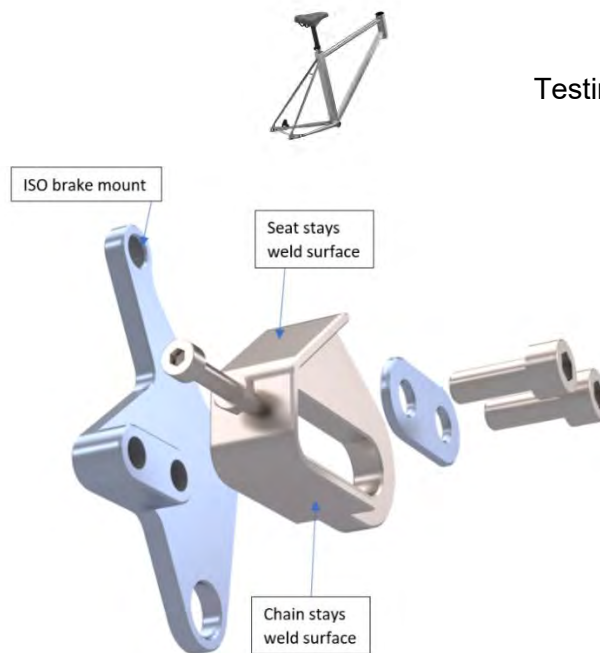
Exploded view of components of redesigned left side dropout subassembly.
